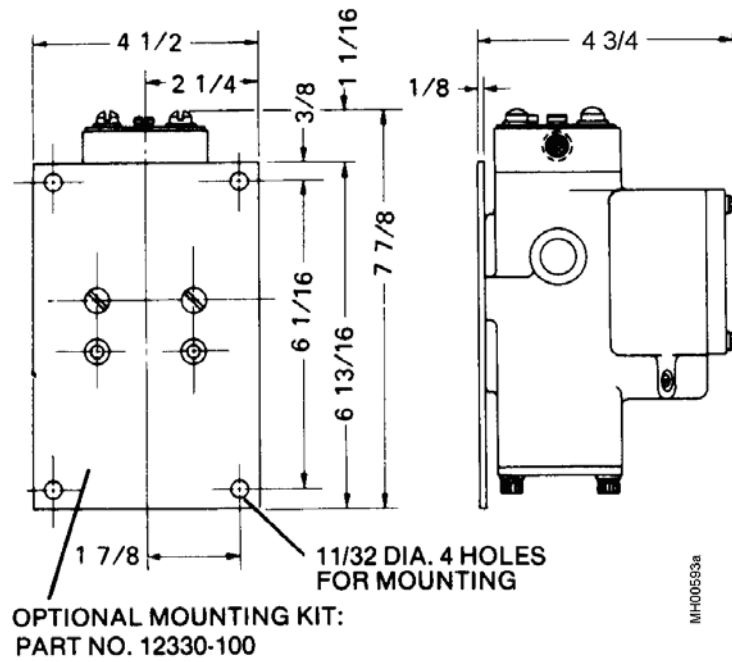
Transducer with Mounting Bracket Dimensions
